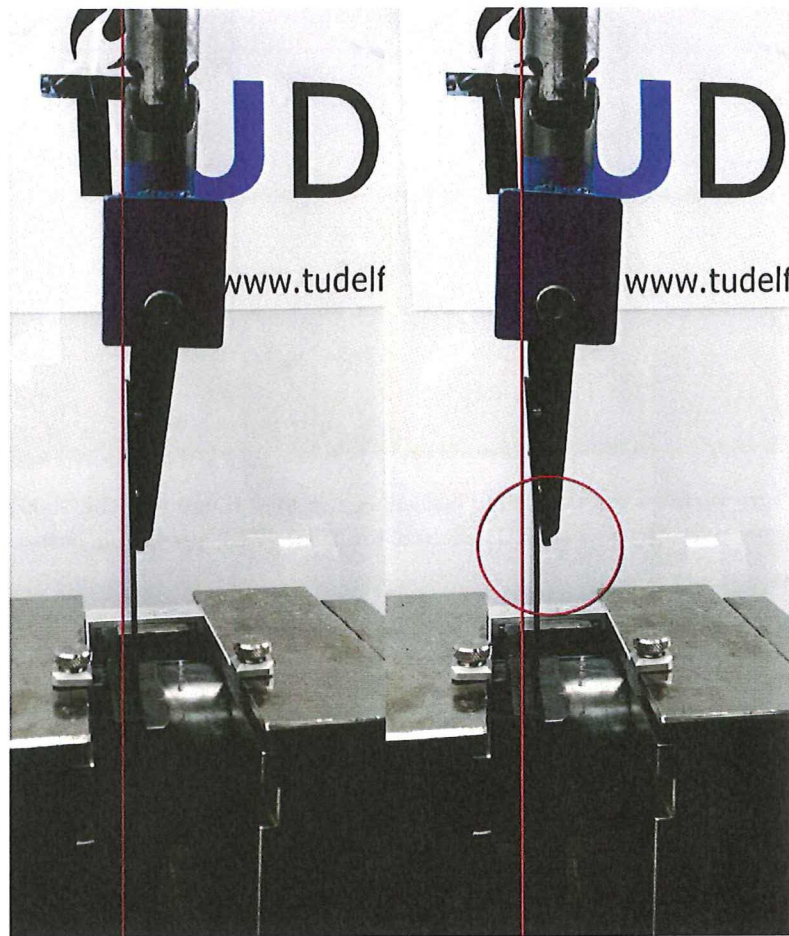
| Tension test using the Zwick universal testing machine to test the hinge weld strength, showing clear signs of induced peel forces
